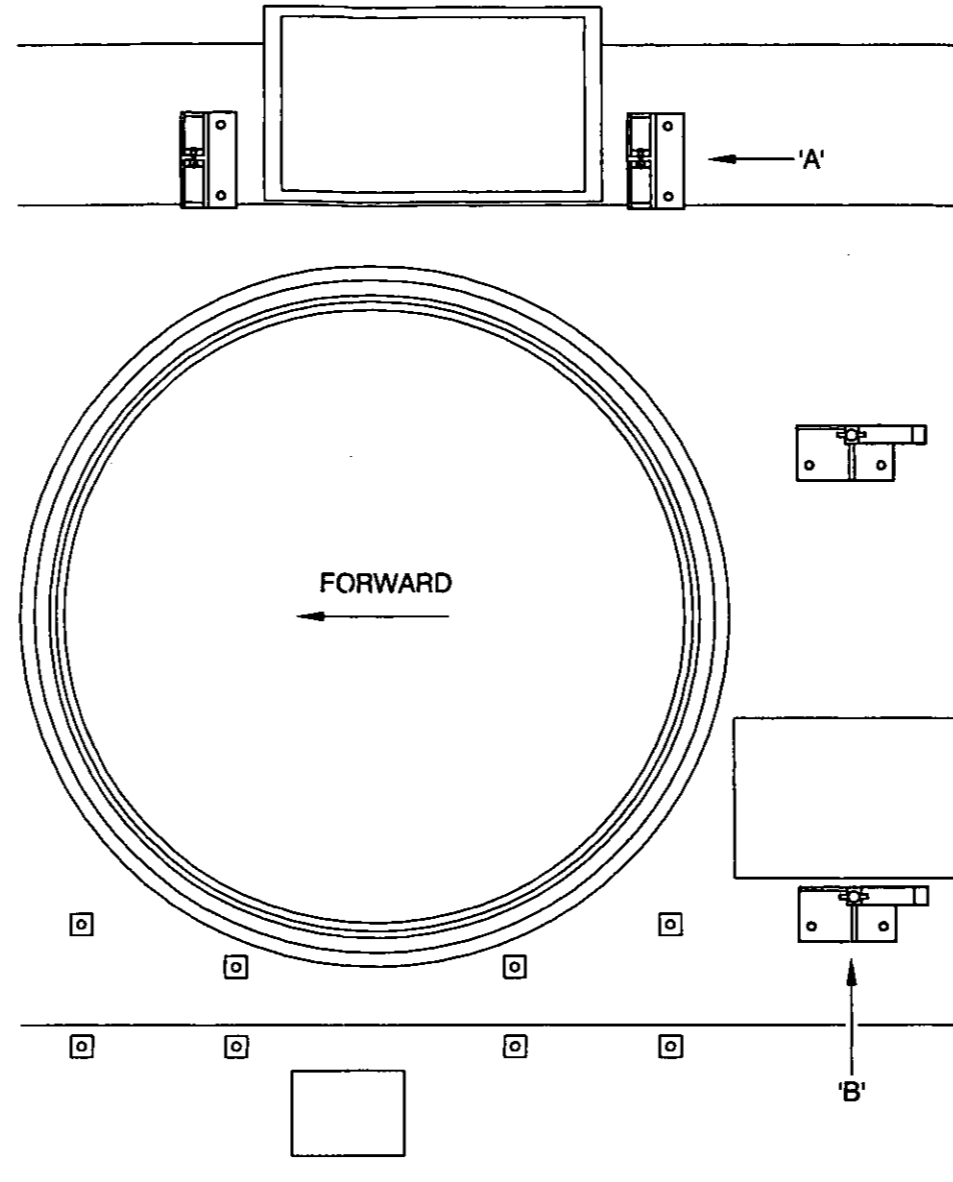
Hull mountings required to fit roof mounted generator, hoist assembly and masts.
